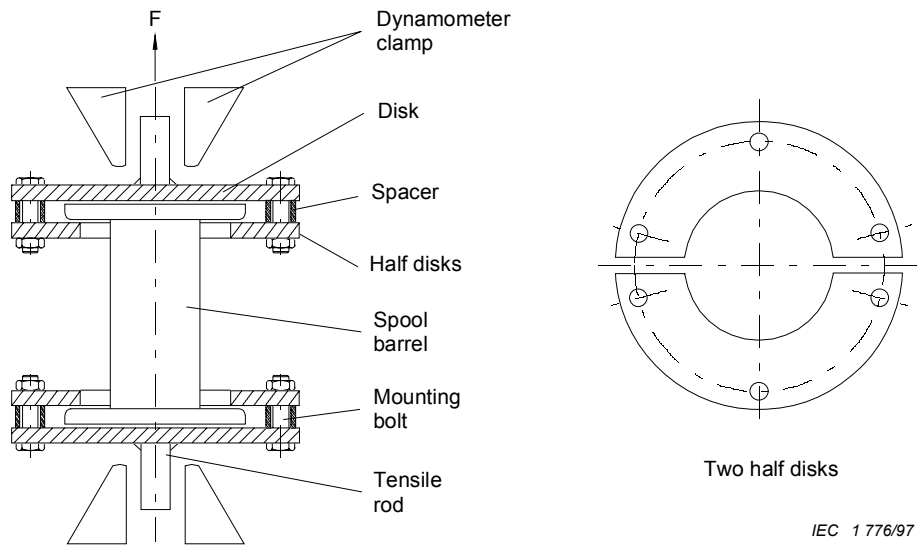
Tensile testing jig for flexibility test (flat flanges)
